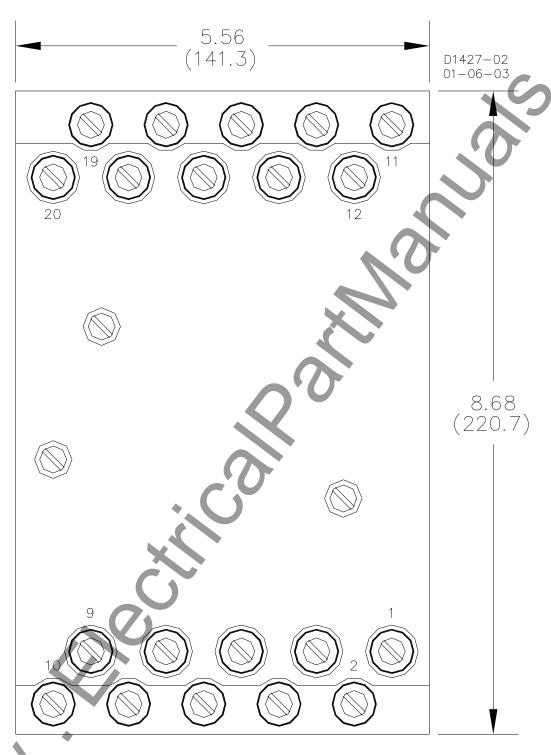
Case Dimensions, Rear View, Projection-Mount Case
